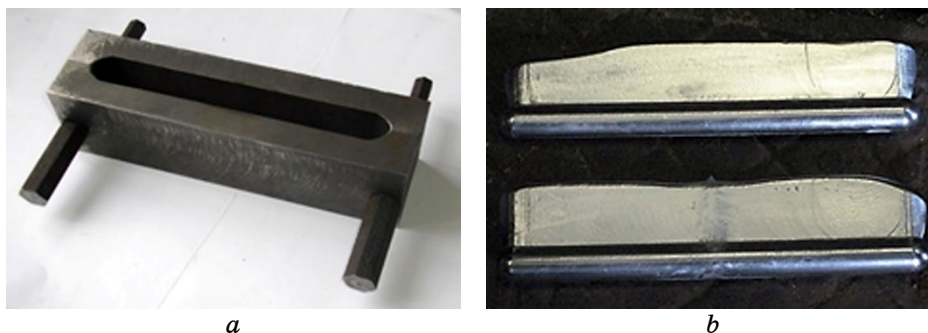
Casting chill mould (*a*) and the cast samples of the alloy with excess material obtained in it (*b*).
